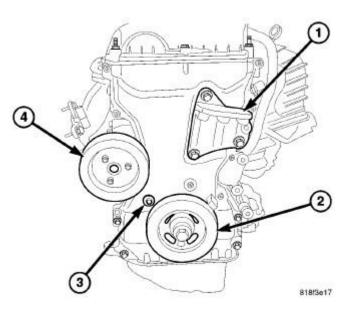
Cooler Assembly Bracket & Bolts Courtesy of CHRYSLER GROUP, LLC
